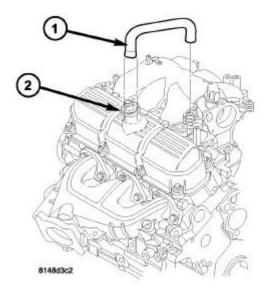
PCV HOSE Courtesy of CHRYSLER LLC
